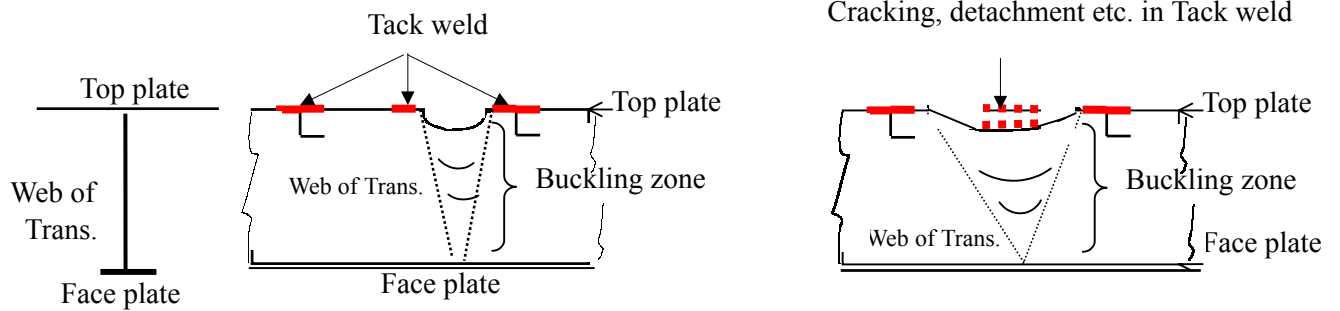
Cracking, detachment etc. in Tack weld and Buckled Trans.Web
